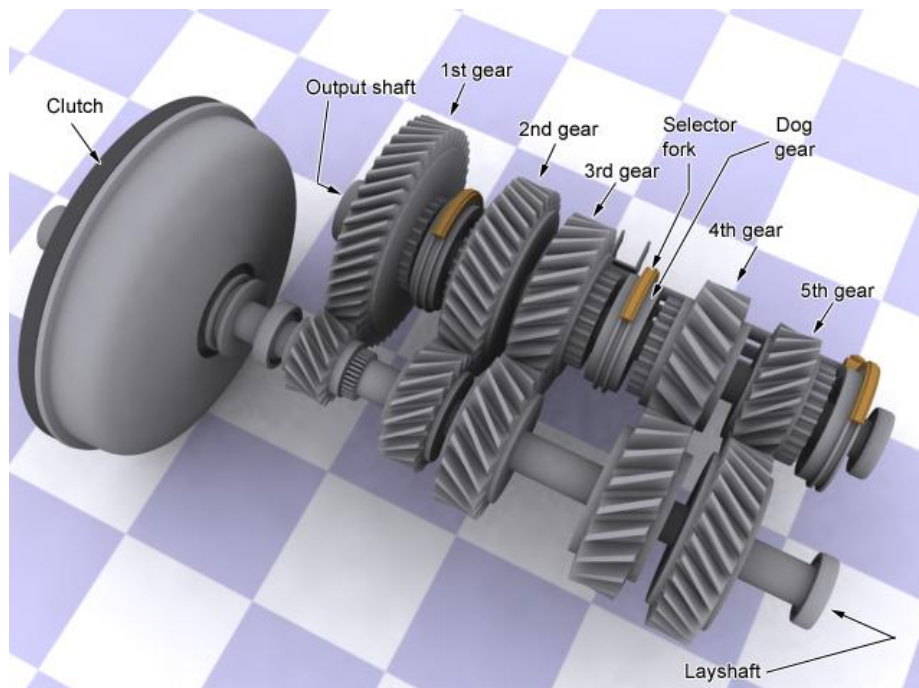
Typical five-speed gearbox (source: [www.carbibles.com](http://www.carbibles.com))
